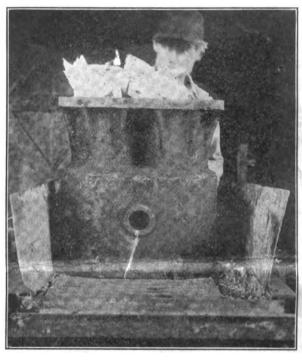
Pre-Heating position of the block. Cylinder bores stuffed with aspestos. Location of Chiseled fracture.
